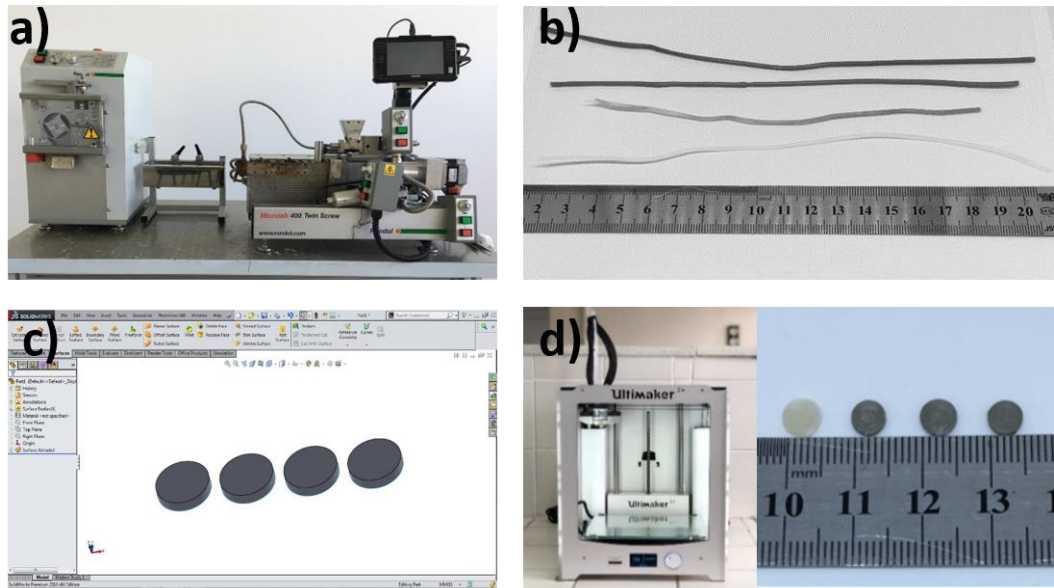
(a) Photograph of twin screw extruder used in this work. (b) Photos of Ag NW/PLA nanocomposite filaments with different Ag NW content. (c) Drawing of test sample in SolidWorks. (d) Photos of FDM 3D Printer, Ultimaker 2+ and 3D printed samples.
